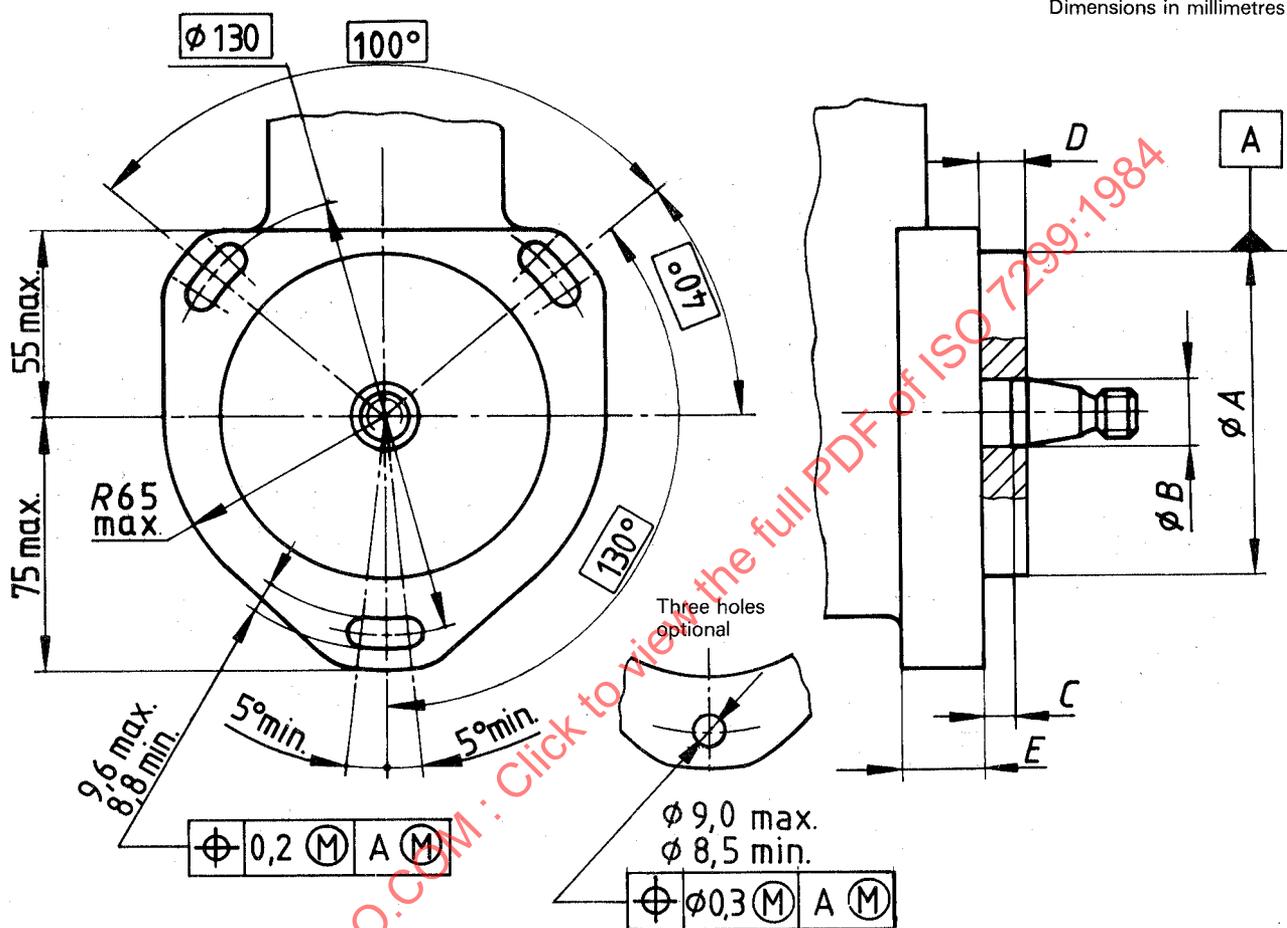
In-line fuel injection pumps — Type 6 end-mounting flange
